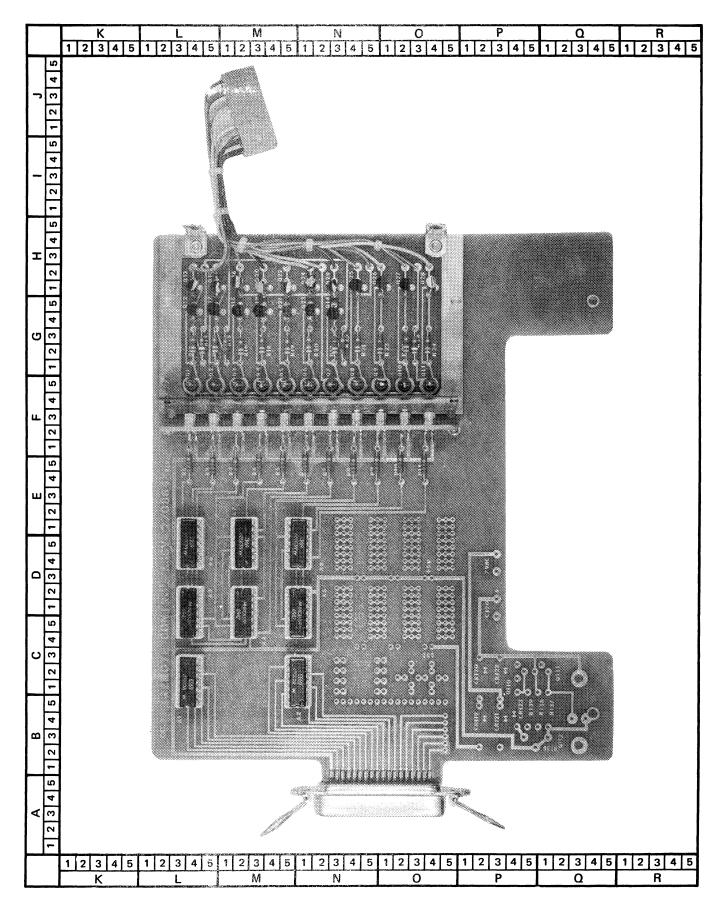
REMOTE CONTROL P/C ASSEMBLY
